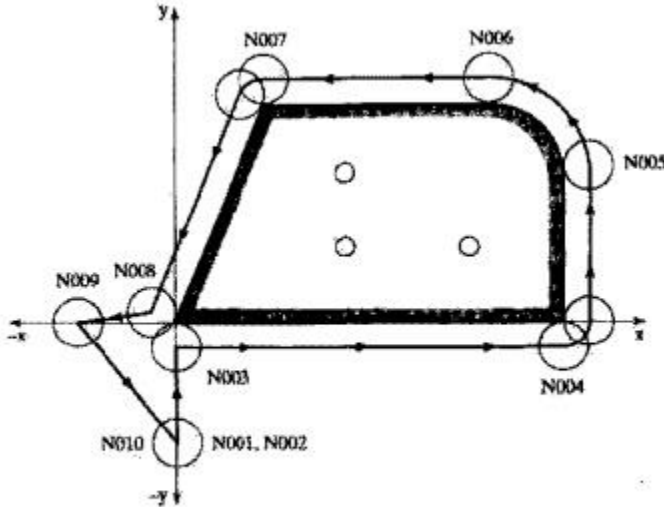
Cutter path for profile milling outside perimeter of sample part.
